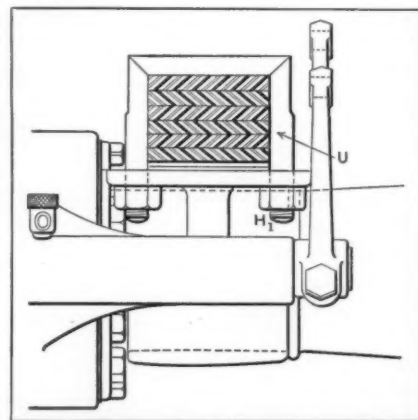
Section of a spring on the rear axle showing the U-spring clips and tightening nuts.
